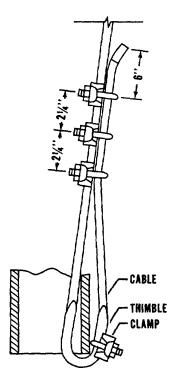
Blocking and tiedown details(railcar stake pocket and wire rope loop)
